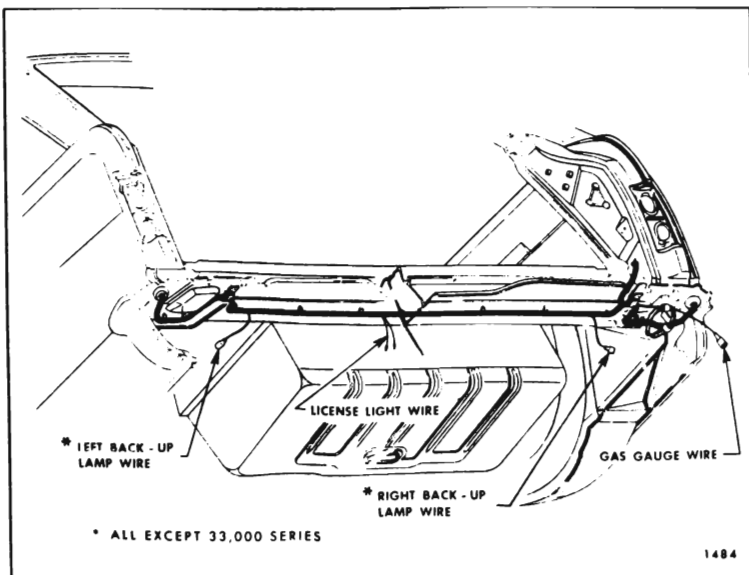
Rear Cross Bar Wiring - All "A" Bodies
